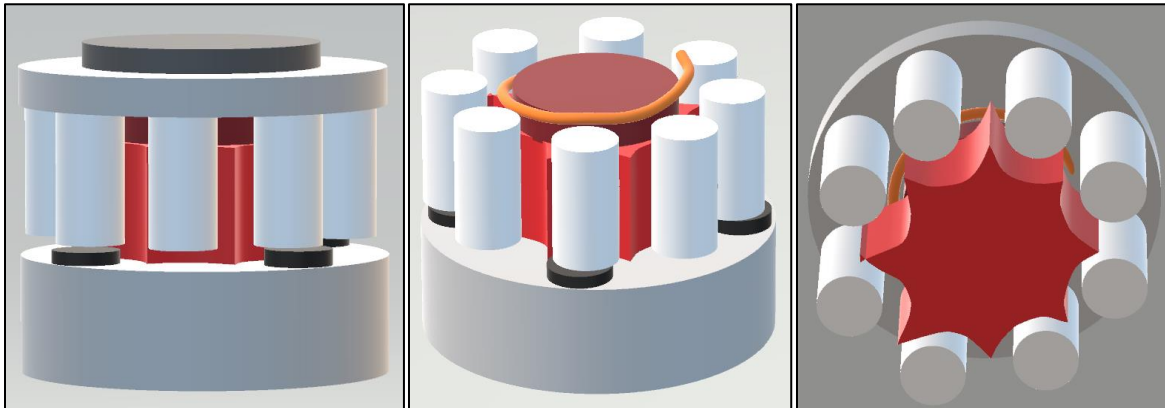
3D model of Prototype v1's internal locking mechanism. Front view (left), top cross-section (middle), and bottom cross-section (right)
